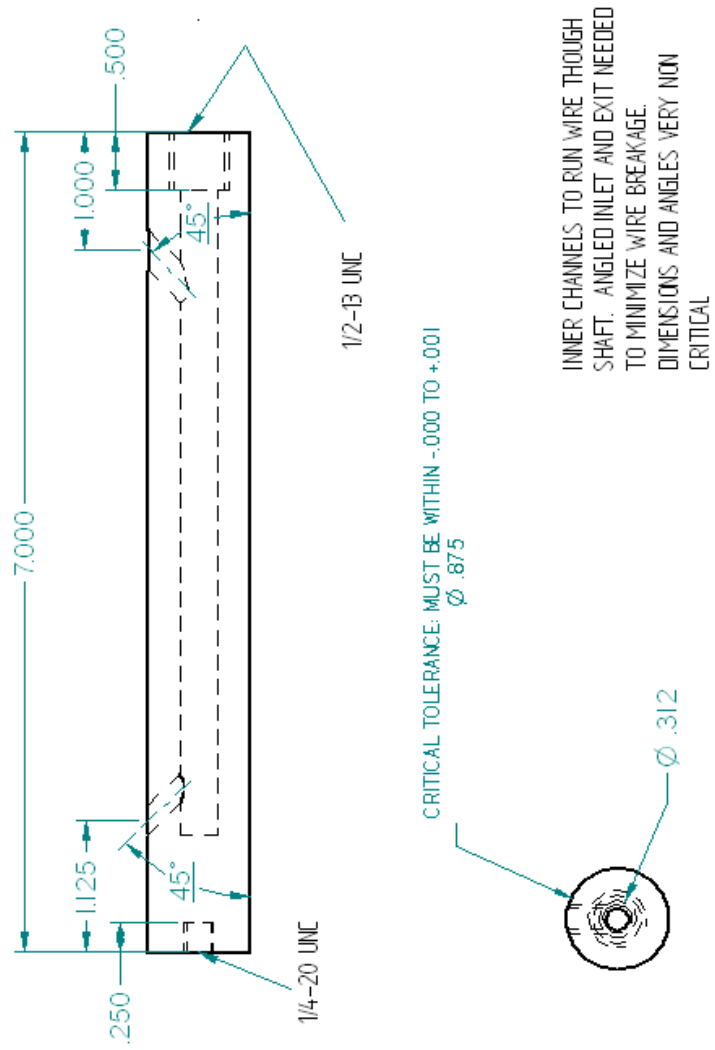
Movable valve rod piece (aluminum). Connected to head piece through set screw.
